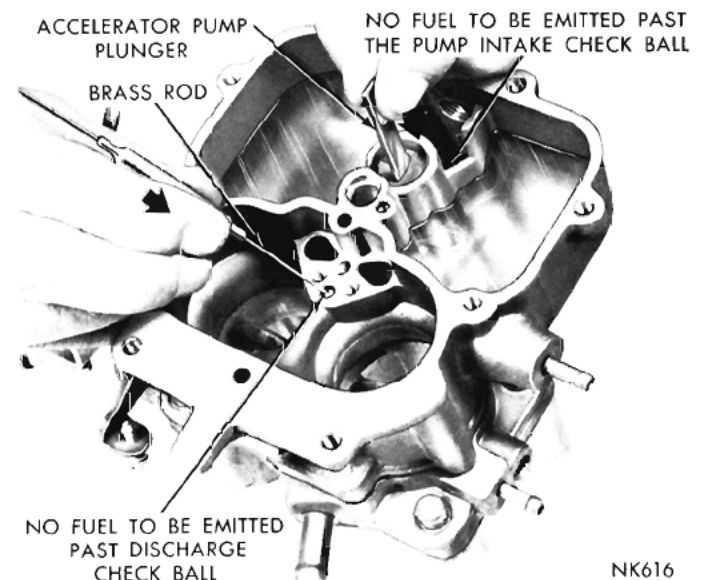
Testing the Accelerator Pump Intake and Discharge Balls Check
